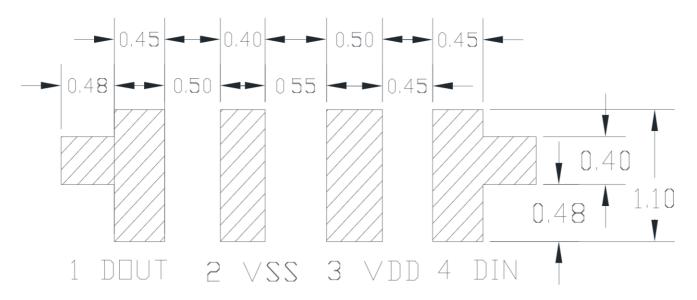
IN-PI31TAS5R5G5B Package Outline Dimensions
